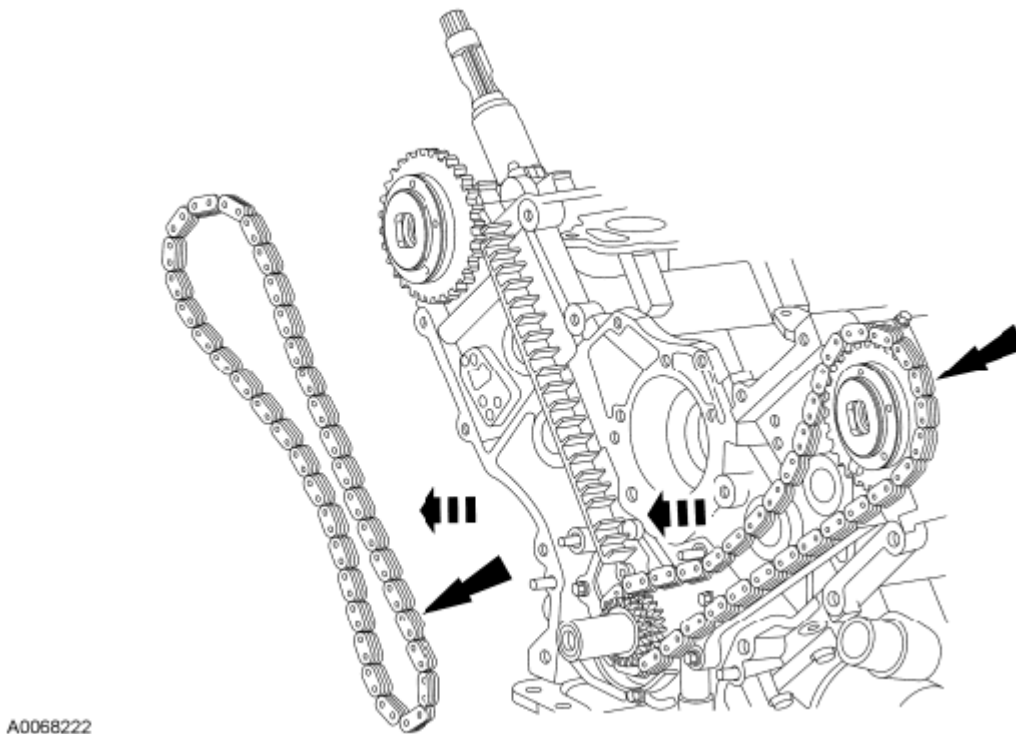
Removing Timing Chains And Crankshaft Sprocket
